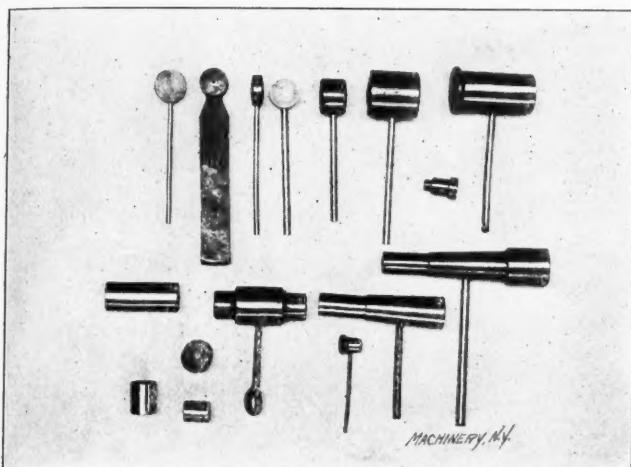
"Typing" Tools used by Die-sinkers to Form Circular Cavities.
